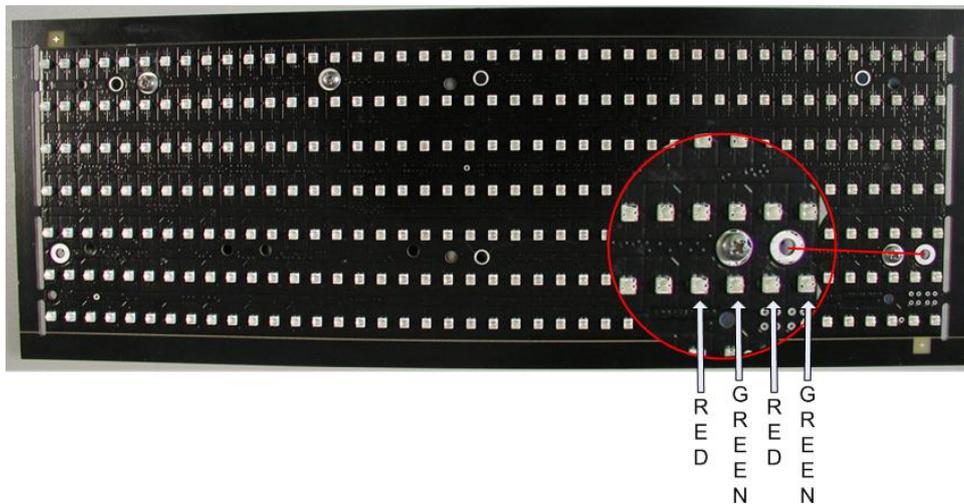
100mm Character PCB Assembly (Red/Green) - Viewed from Front
